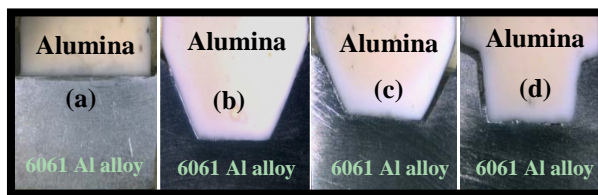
MICRO CROSS-SECTION VIEWS OF FRICTION ZONE WELDED BY, (a) FLAT CERAMIC FACE TO FLAT METAL FACE, (b) TAPER PIN ANGLE 60° CERAMIC FACE TO FLAT METAL FACE, (c) TAPER PIN ANGLE 30° CERAMIC FACE TO FLAT METAL FACE, (d) PIN CERAMIC FACE TO FLAT METAL FACE.
